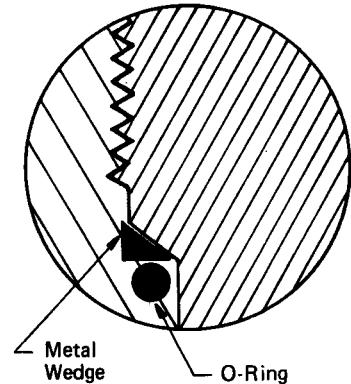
Self-sealing O-ring closure and back-up ring.
